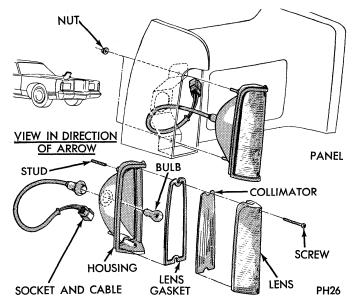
Fender Park and Turn Signal Lamp– Carline C (New Yorker Brougham)
